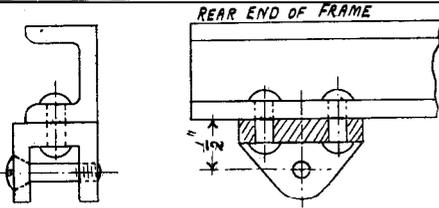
Two THUS FOR REAR SPRINGS. (Full size.)
